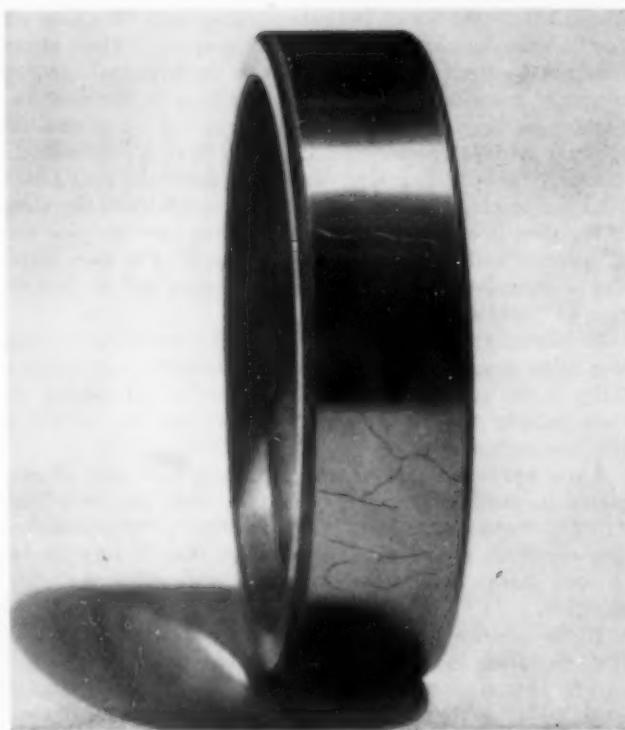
Cracks in cylindrical surface, roughly perpendicular to circular grinding marks.
